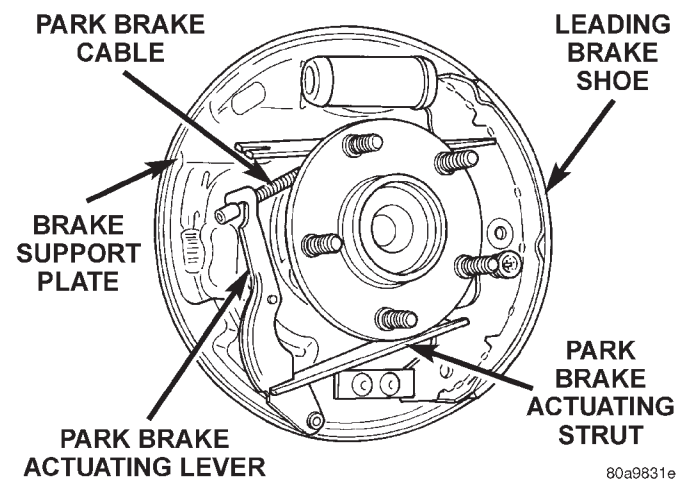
Park Brake Components Assembled On Leading Brake Shoe
